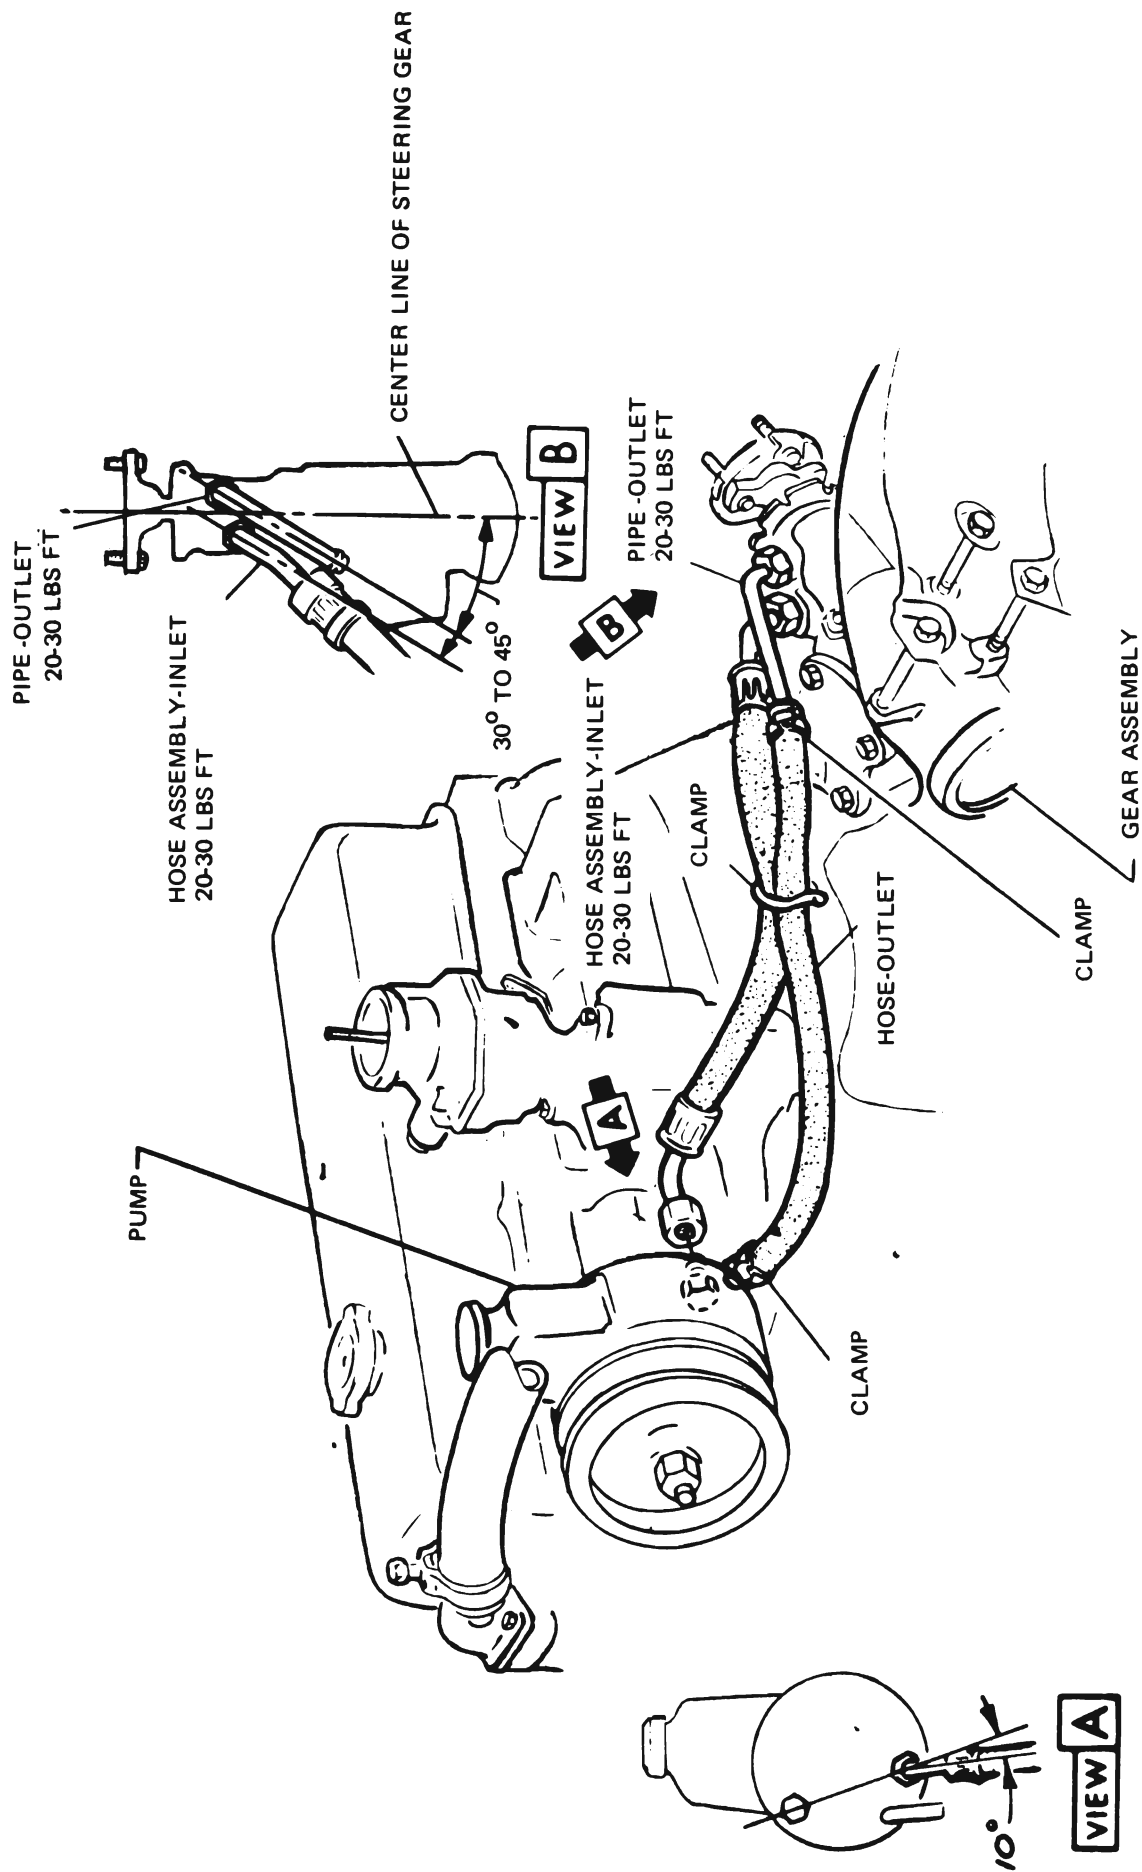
F-54 - A-B 350 Oil Pump Hose Routing
